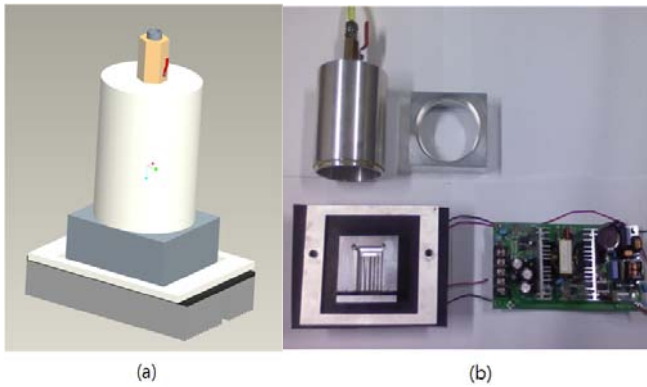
(a) 3D modeling of ani-stiction equipment using pro-e (b) Figure a component parts(controller, Peltier, vacuum device)
